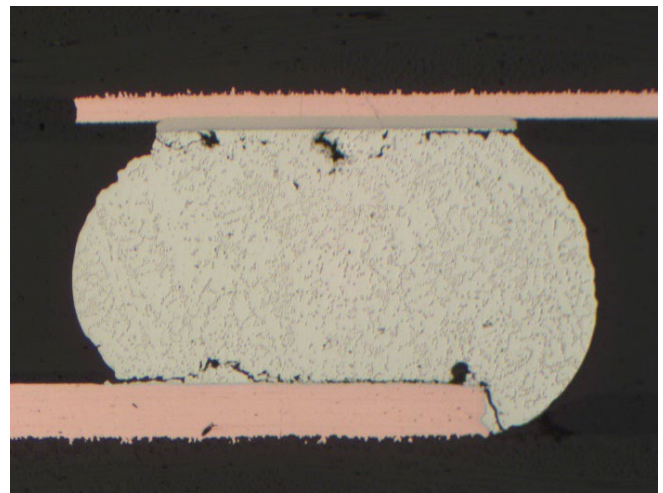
Senju 794 Solder Alloy BGA (failed at 700 cycles)
